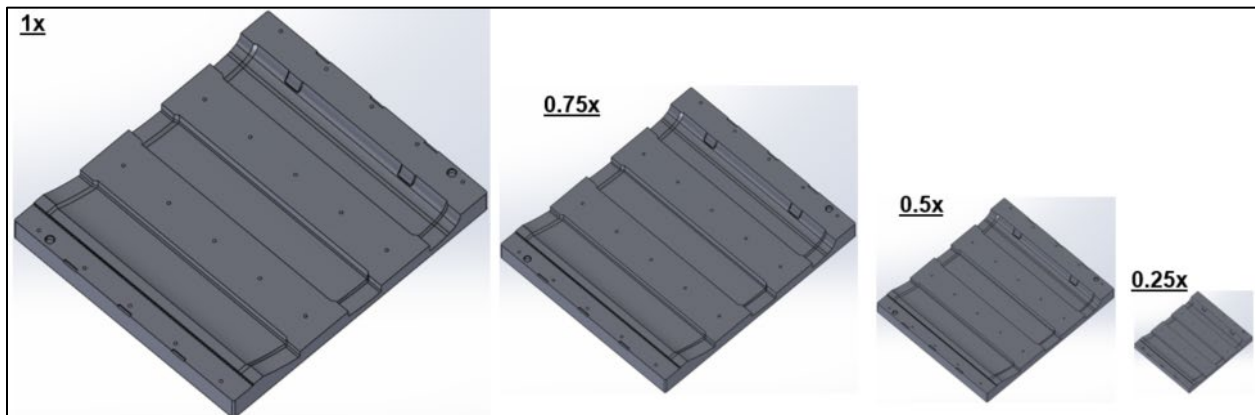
Original CAD File of SpinTech’s Trailing Edge Smart Tool Master
